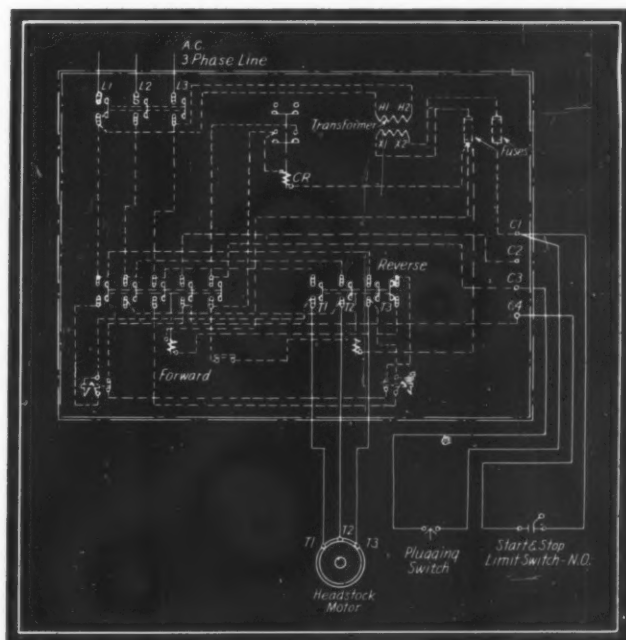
Complete panel and machine wiring diagram showing a plug braking control as applied for headstock drive on a grinder. Being a two-wire control circuit, low voltage protection is not provided, obviating terminal C2
